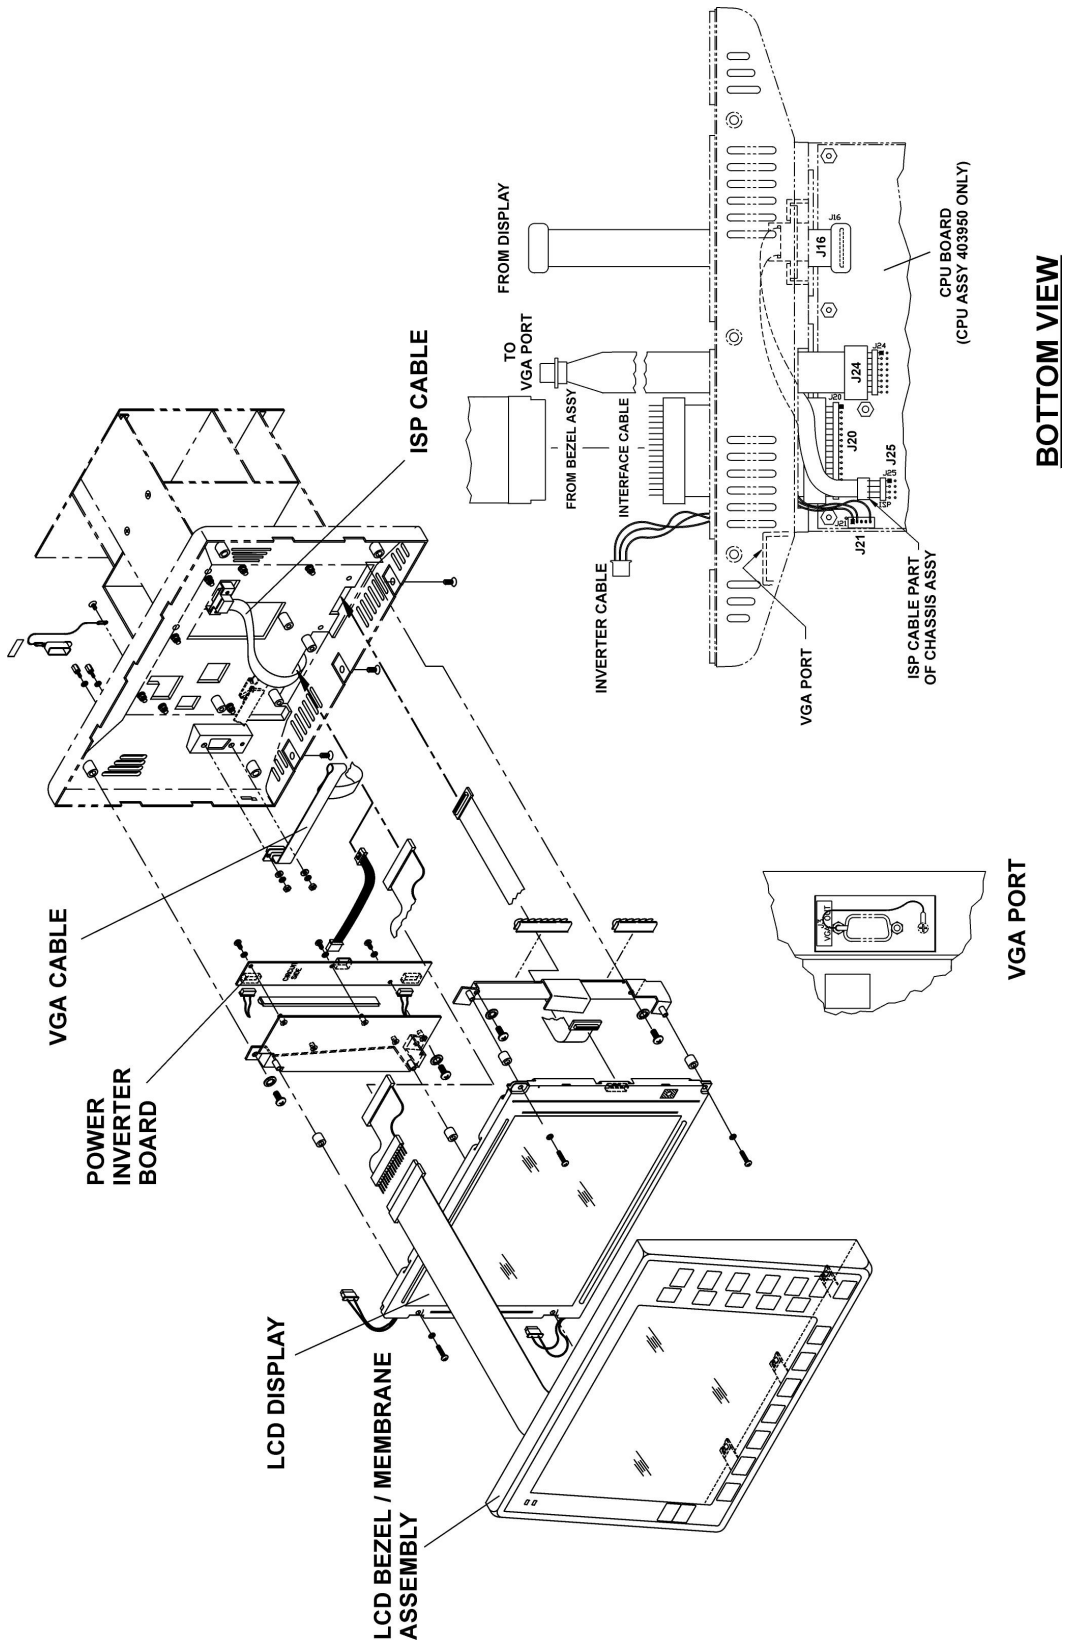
PRISM Color Display Assembly (Sharp Display & CPU Board 403950)
